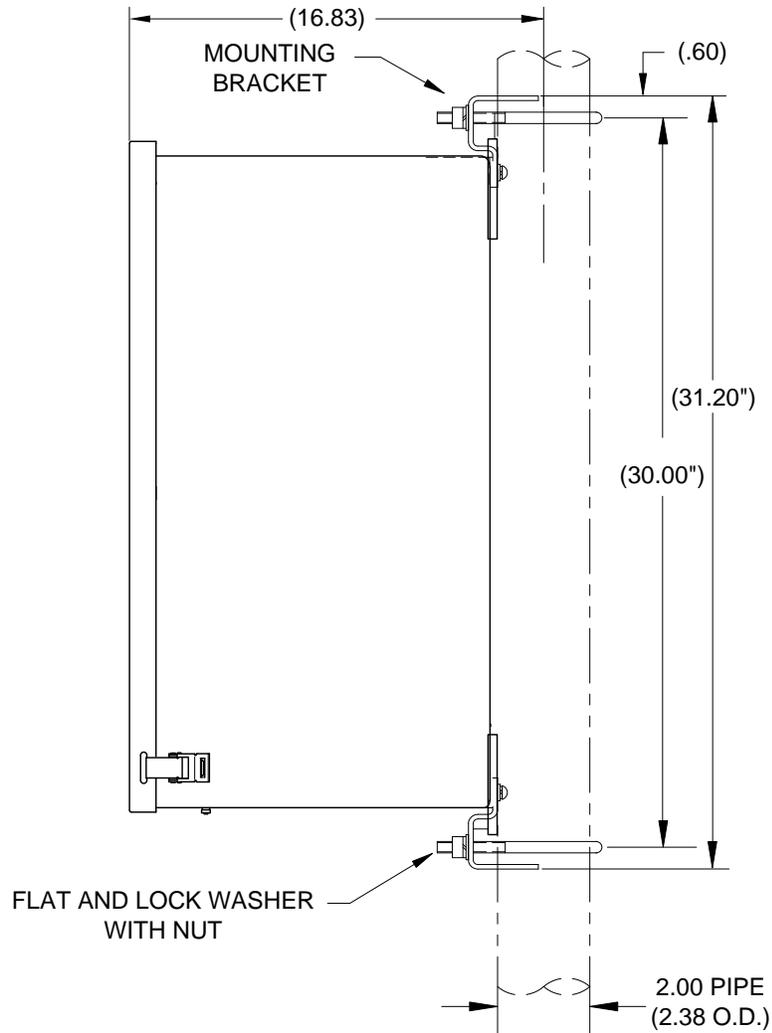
6200 Enclosure Pipe-Mounting Installation
